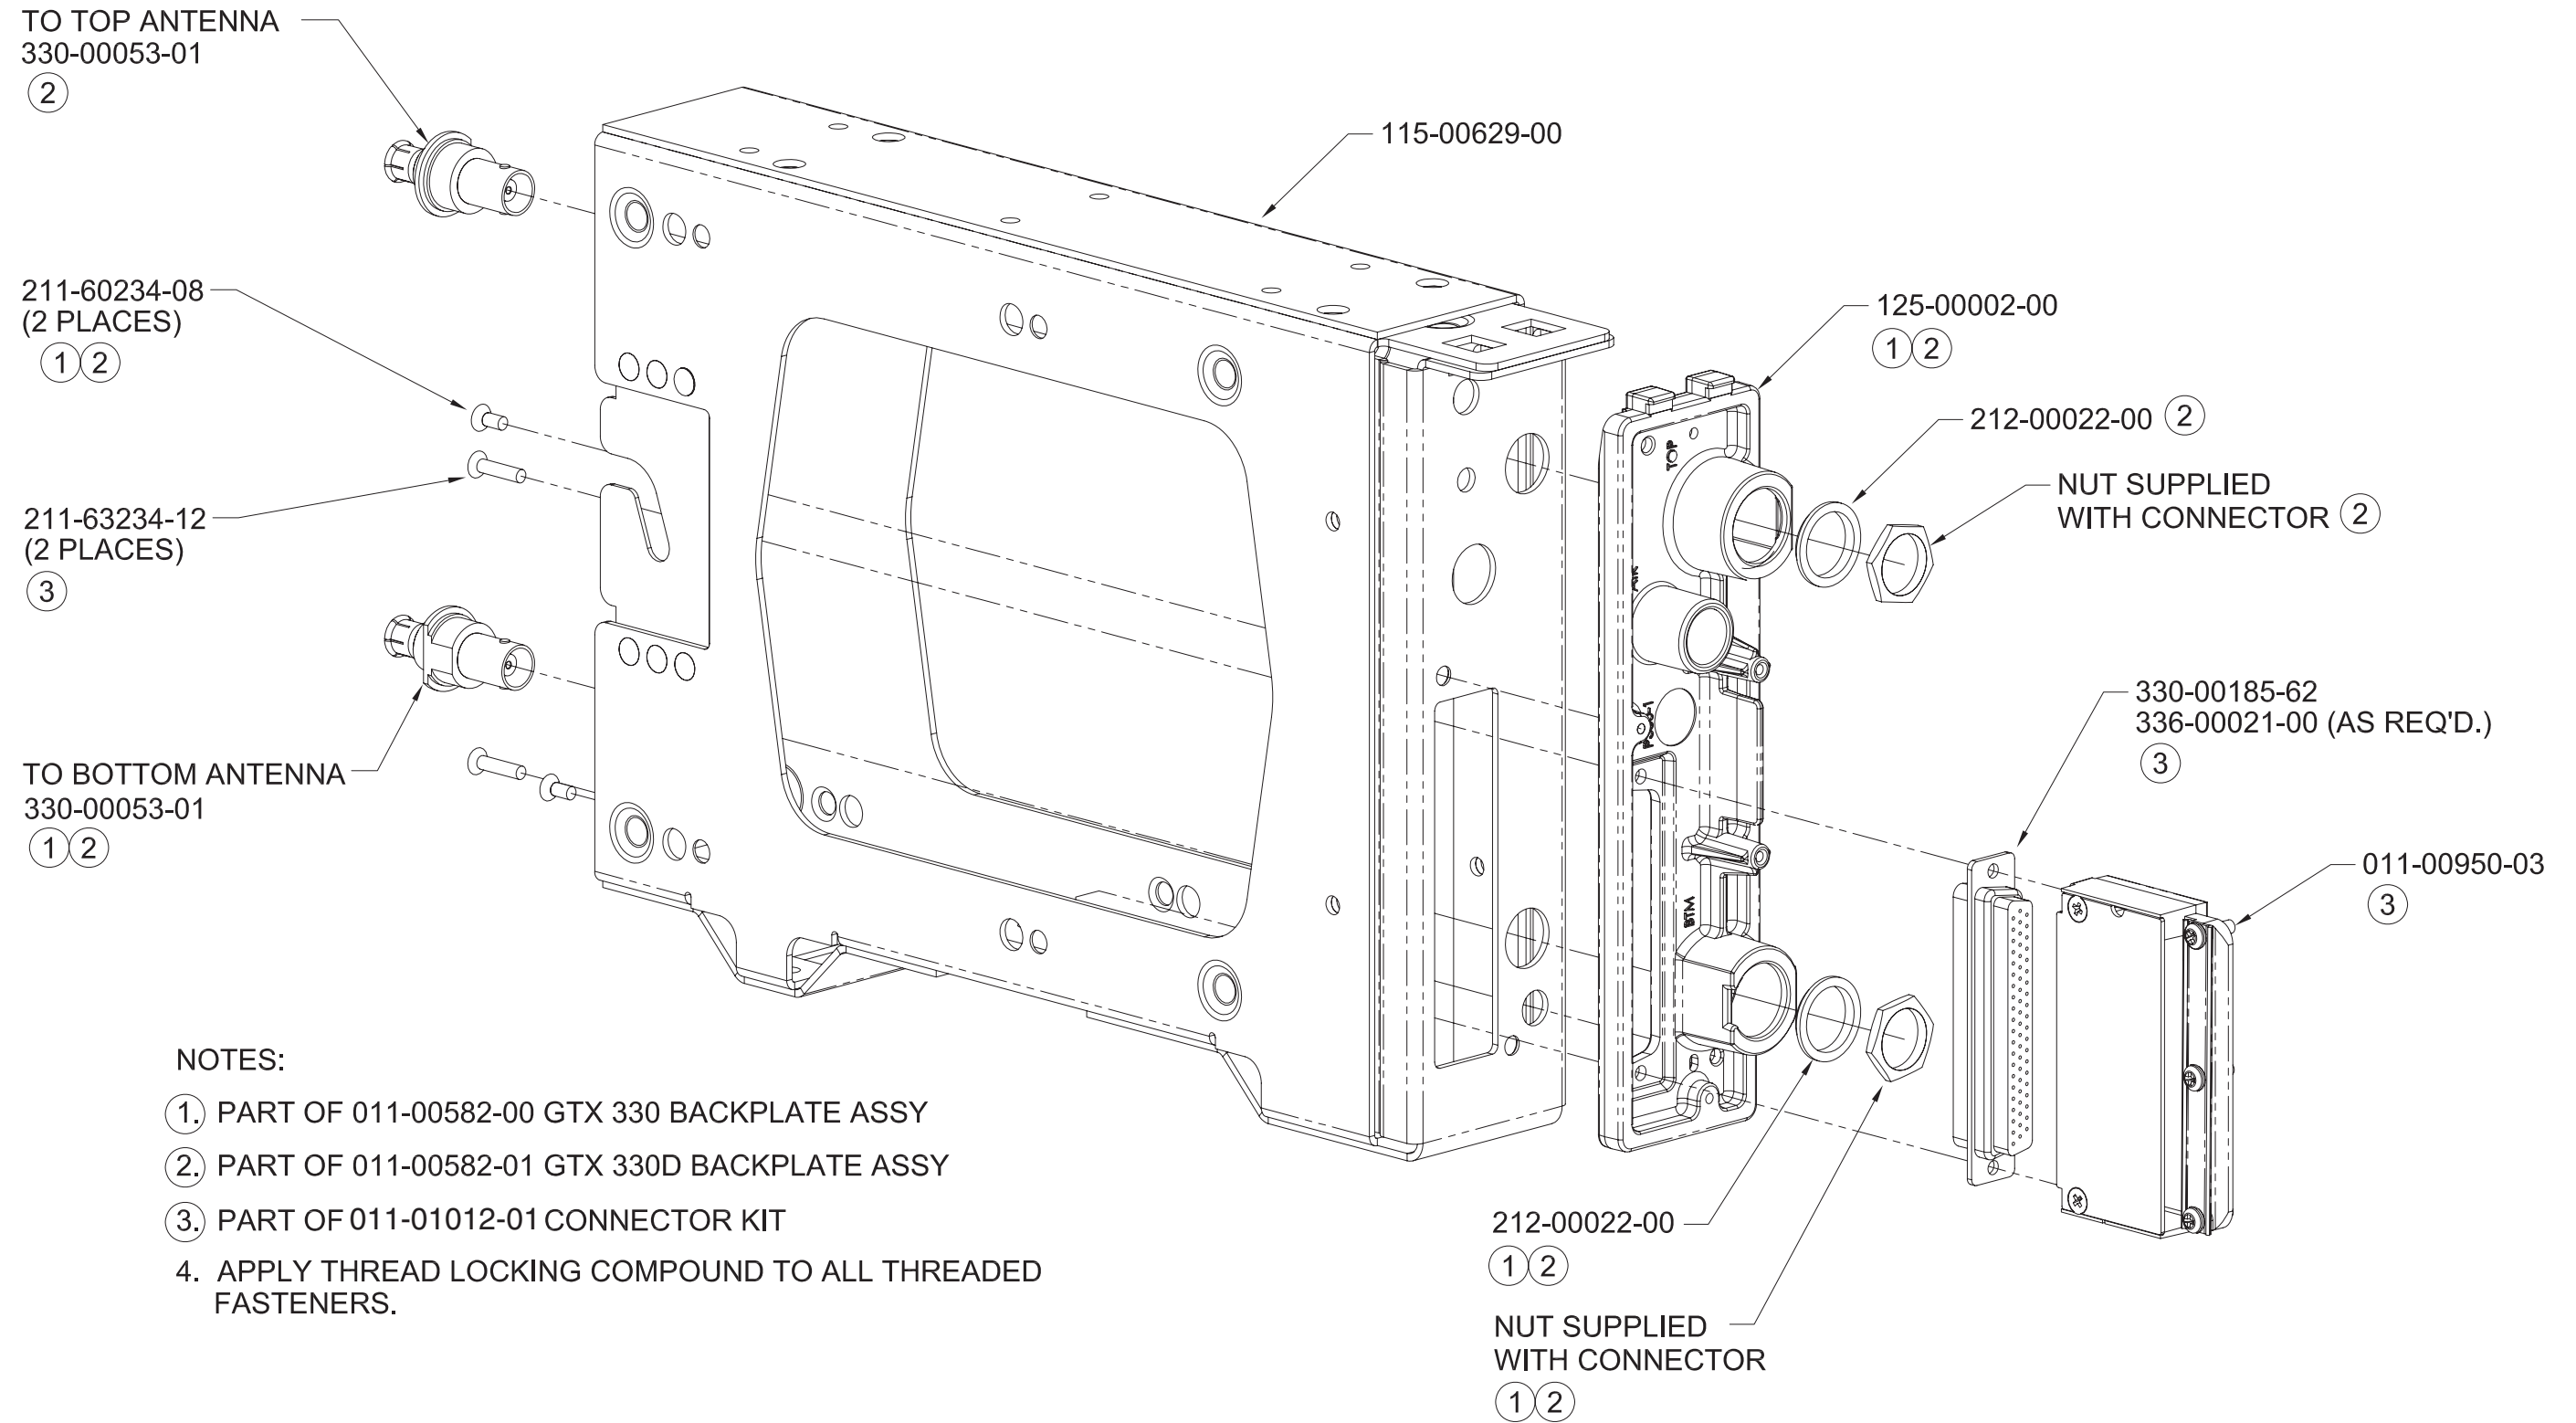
GTX 33 Remote Stand-Alone Rack/Connector Assembly
